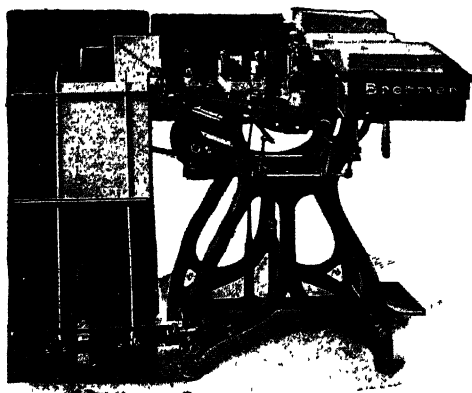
"BREHMER" END-SHEET PASTING MACHINE.
